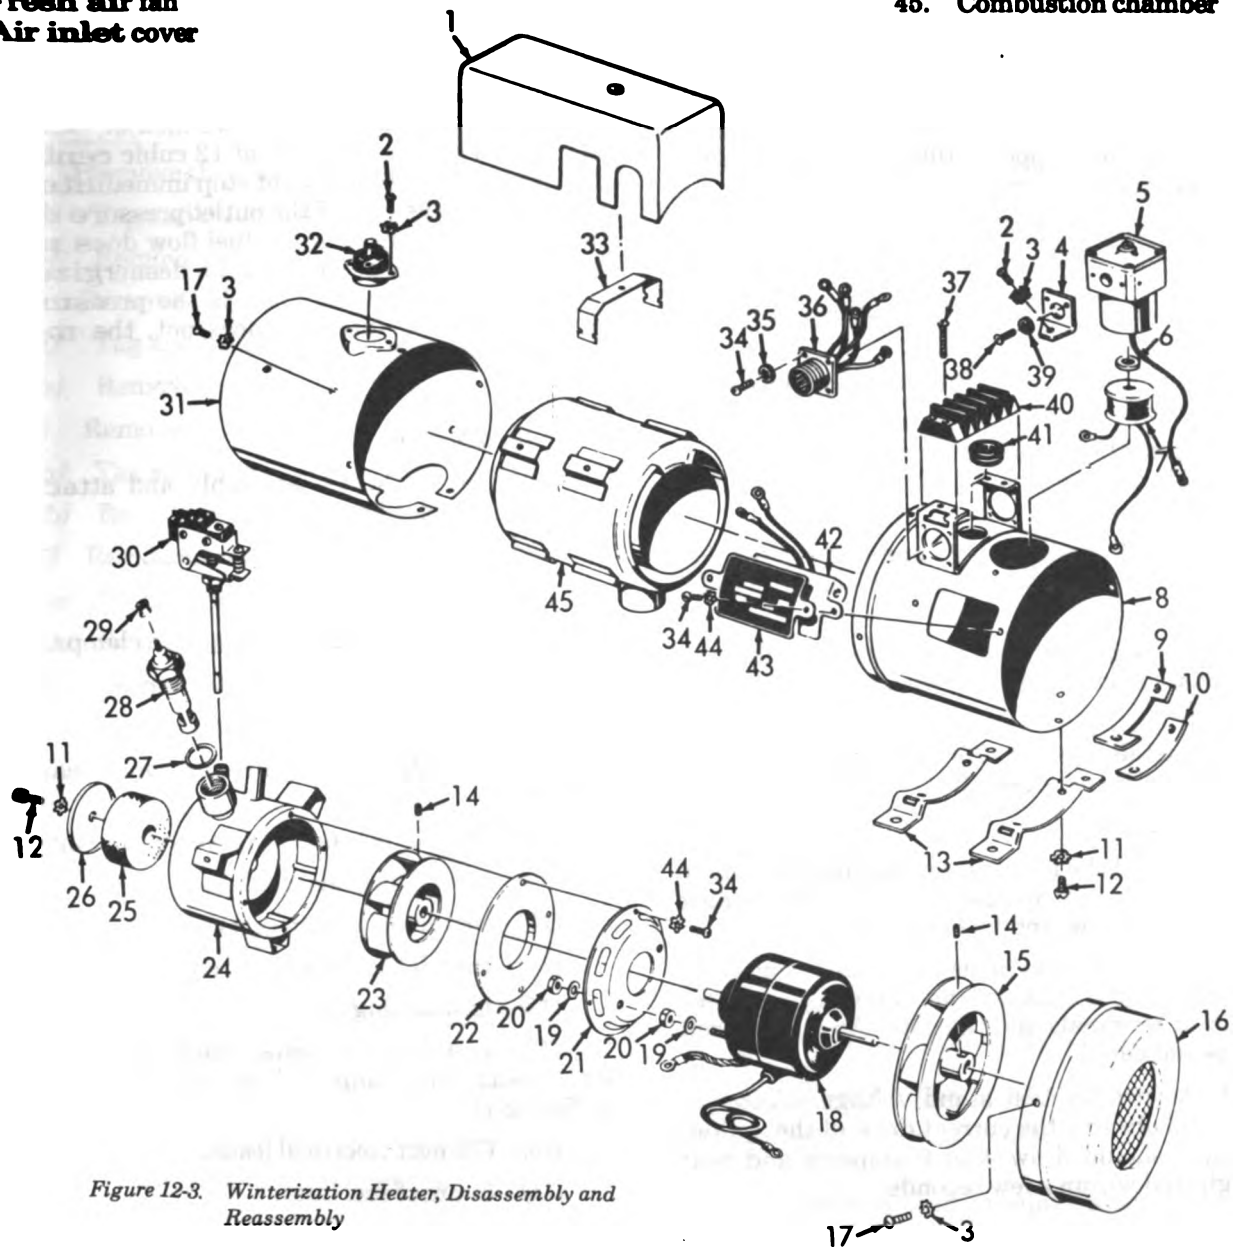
Winterization Heater, Disassembly and Reassembly
